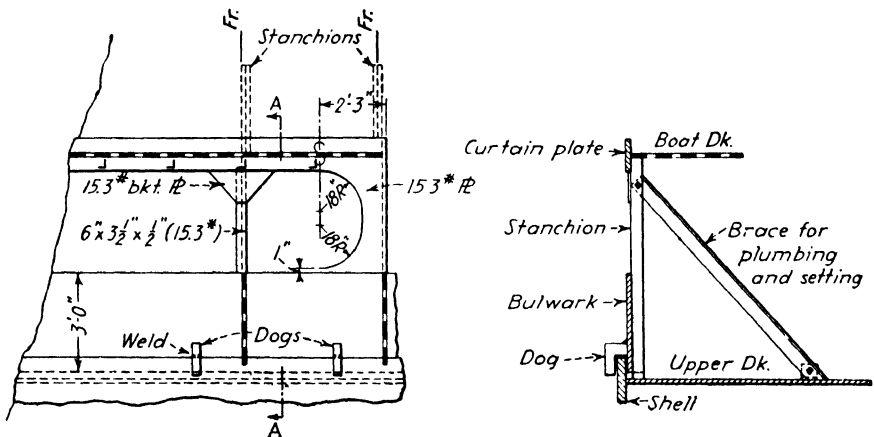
Dogs welded at bottom of bulwark for holding the bottom in position.
